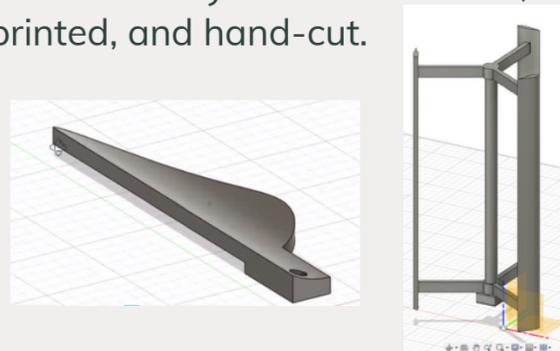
Horizontal axis blade and vertical-axis turbine design in Fusion 360
